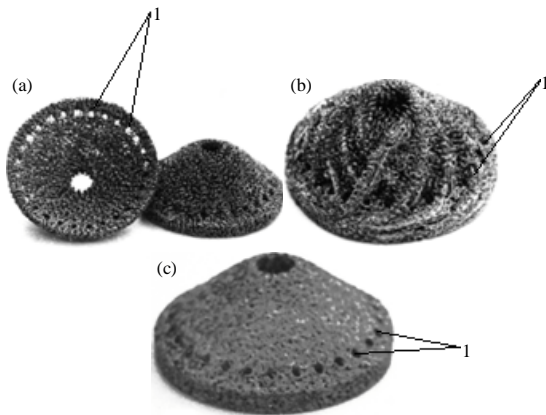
Main stages of reinforced EDE production; a) EDE parts; b) HRRE; c) finished EDE; 1: fixing holes
